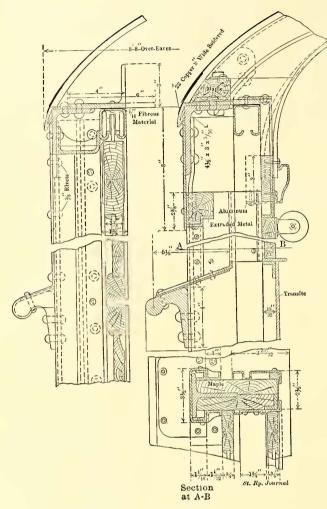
DETAILS OF BODY CORNER POSTS AND DOOR POCKET
